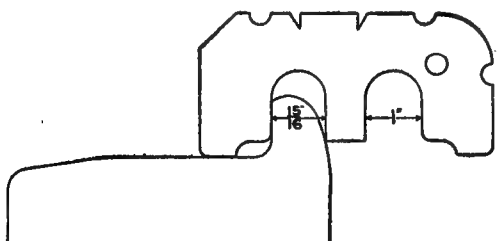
METHOD OF GAGING WORN FLANGES—SEE RULE 74.
